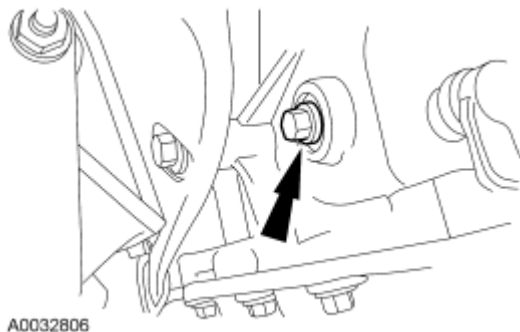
Installing Bolt Through Crankshaft Pulley And Thread It Into Front Cover
